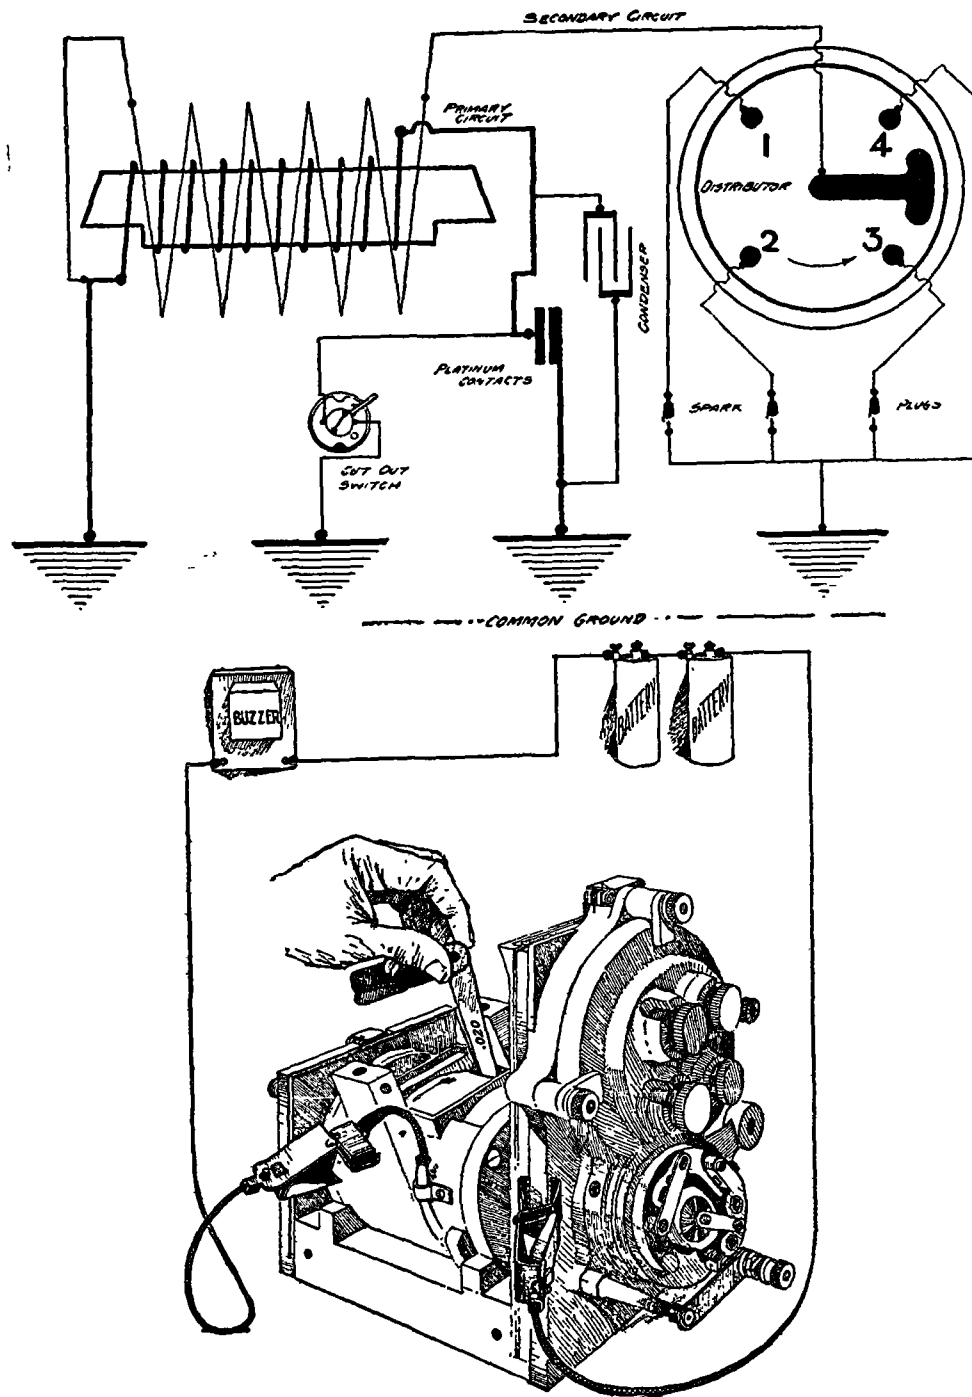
Method of connecting buzzer to magneto primary circuit, for accurately setting the relation of contact opening, to rotor position.
